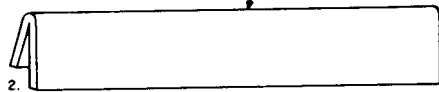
Receiver-transmitter SLS test panel dimensions.
